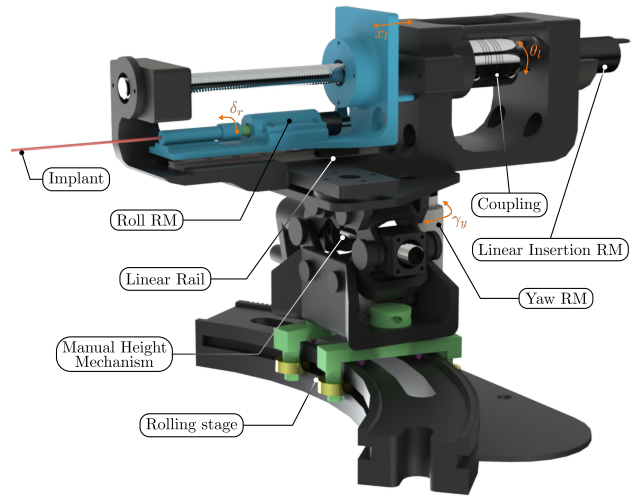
A rendering of the proposed robot showing the key components. RM, rotary motor
